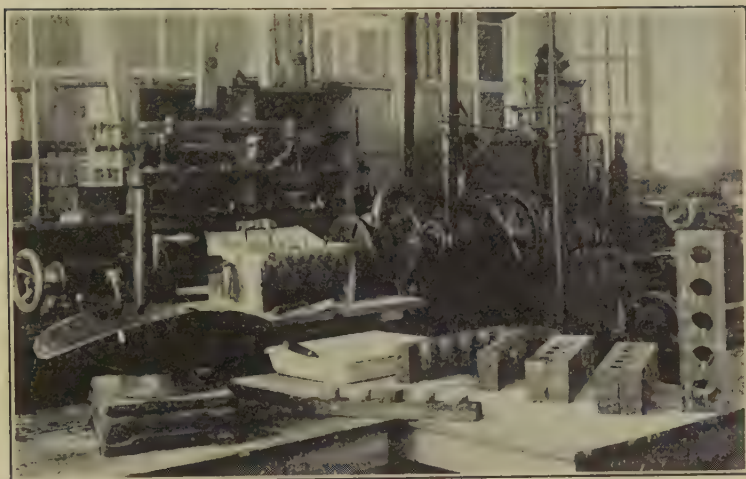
EQUIPMENT USED IN MAKING LABORATORY SPECIMENS:
